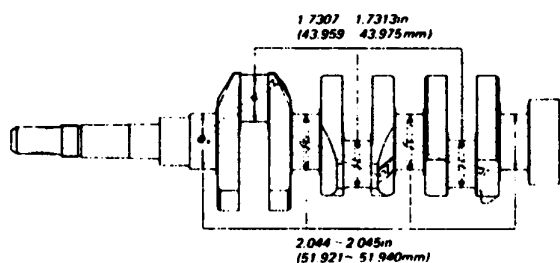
Standard Dimensions of Crankshaft and Bearings
